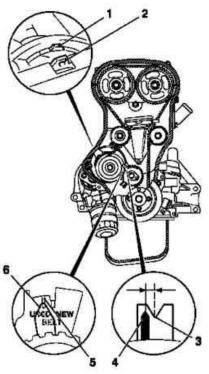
Check the installation of coolant pump: 1 - the tide on the engine block, 2 - projection coolant pump, 3 - groove; 4 - pointer tension pulley toothed belt 5 - Tag «USED»; 6 - Index toothed belt tension pulley
